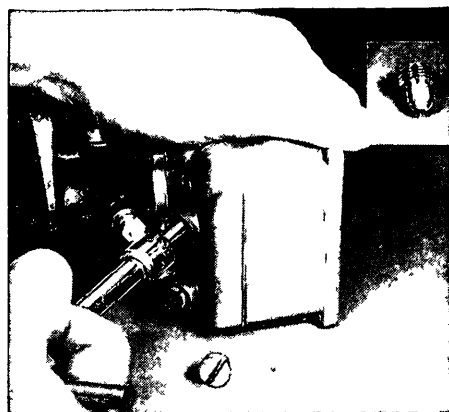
Remove main discharge jet plug (tool T-19099) and metering jet (tool T-24924). Scrap metering jet
